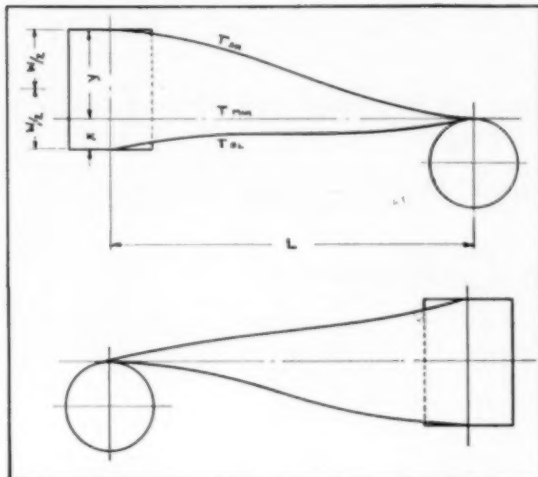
Sketch of quarter-turn set-up, not symmetrical. Side view shown above, top view below.
